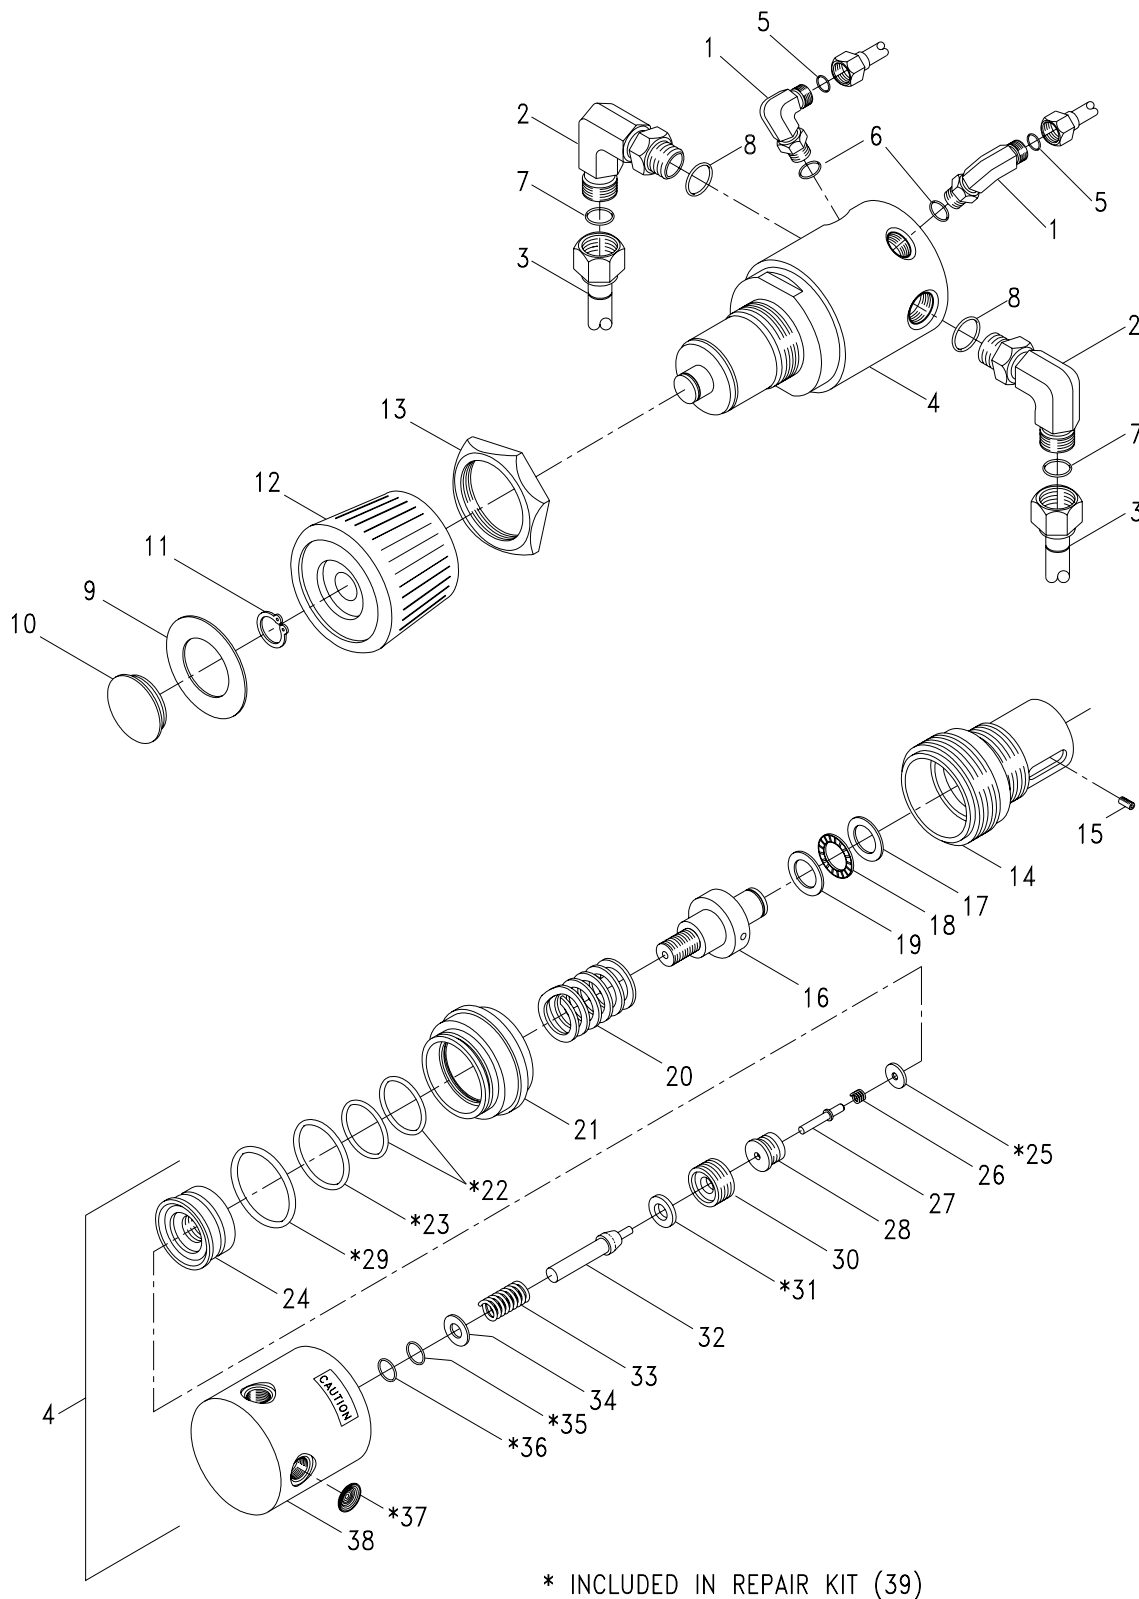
Tescom Regulator Valves (AHP-V303, -V304) (Sheet 1 of 3)
